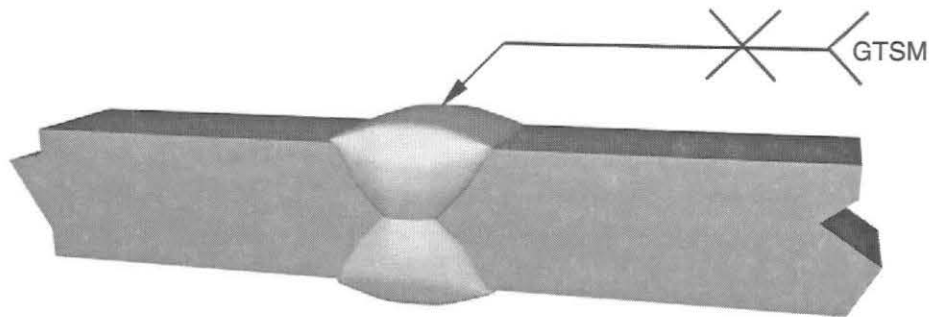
Typical Type 1 weld joint; GTSM—gouge to sound metal.
